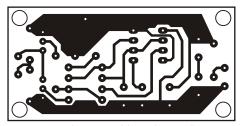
Actual - size, solder-side PCB layout of Transmitter.
